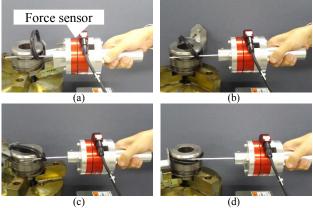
The human assembly using a rod-shaped tool and a scroll chuck on a rotation table where a human holds a force sensor with a rod mounted on the tip
